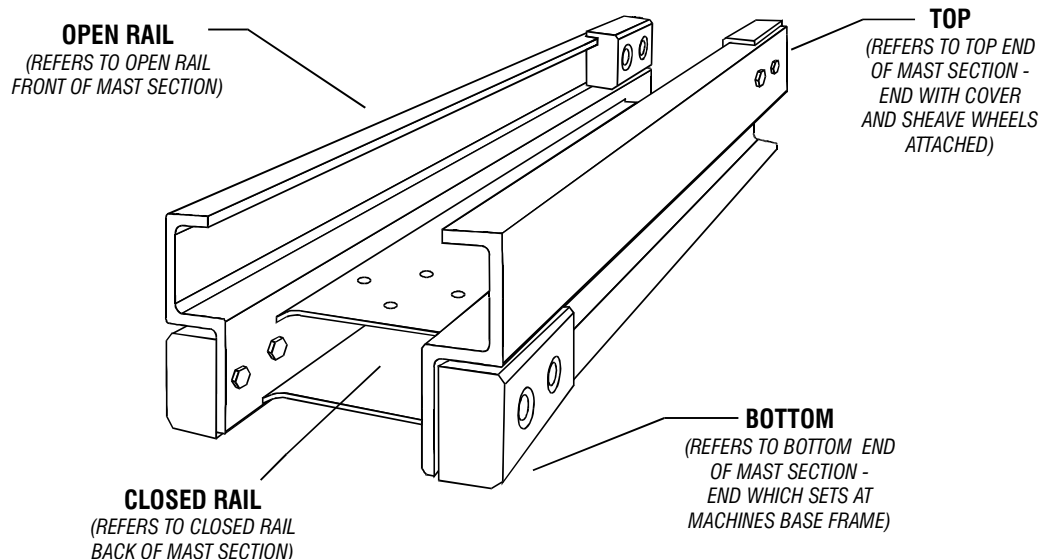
Mast Section - Assembly/Disassembly Reference.
